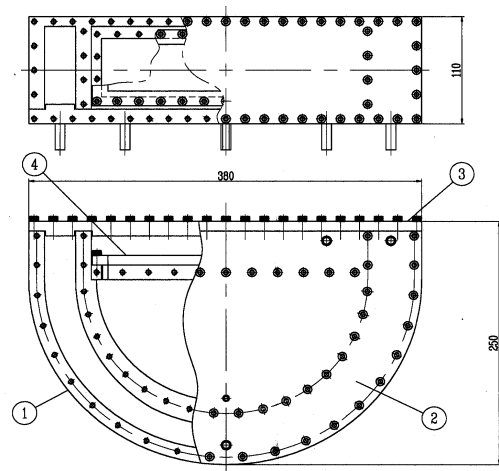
Detailed Drawing of the Mini-SIGMA 2D Test Section
